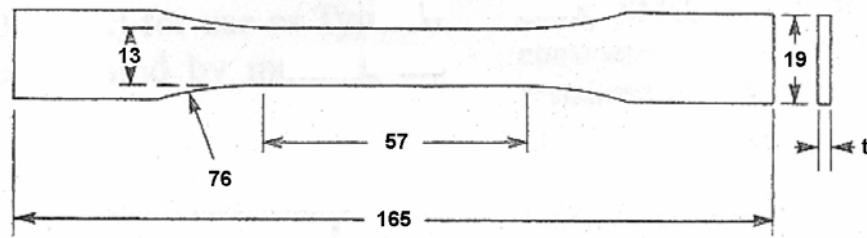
Dimensions of ASTM D638-03 Type I tensile coupons. All dimensions in mm. (Reproduced from Ref. [42].)
